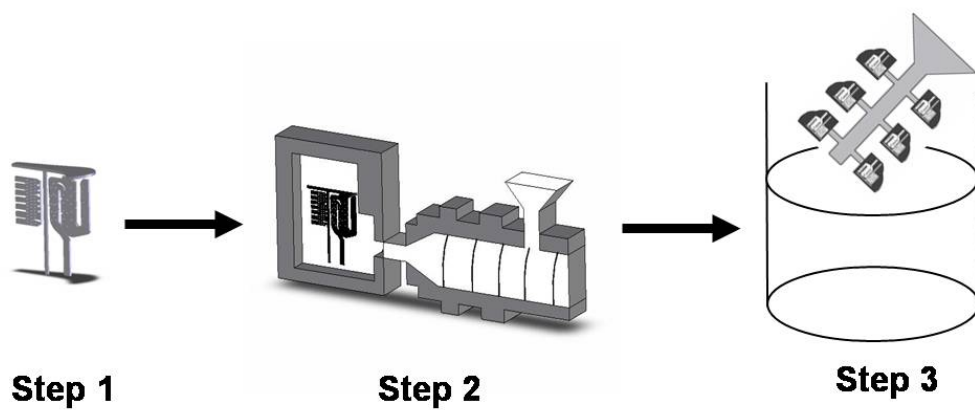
1 Schematic diagram of the several processing steps in the conventional lost wax process how to build ceramic mold for super alloy airfoils; (a) Step1: make core, (b) Step2: mold wax pattern to define metal, and (c) Step3: build shell mold over wax pattern.
